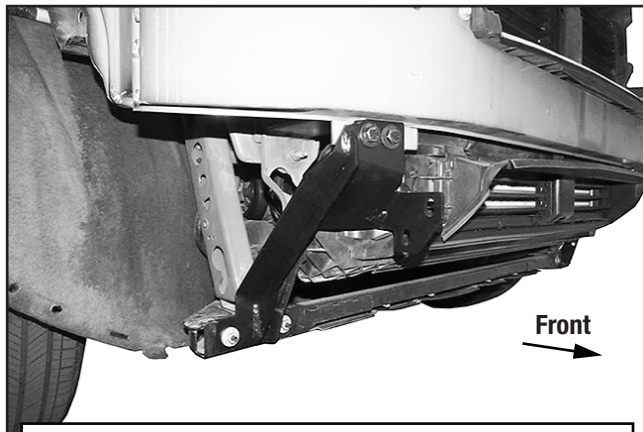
A) Reuse the outer factory Flange Nut to attach bottom of Mounting Bracket (passenger/right side Bracket pictured)
